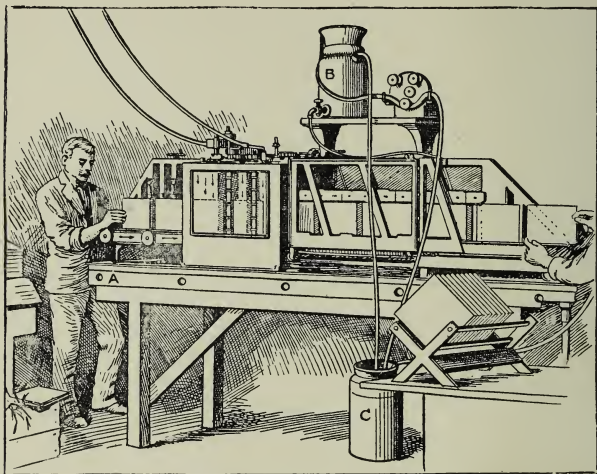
A Glass-Plate Cleaning and Coating Machine.
